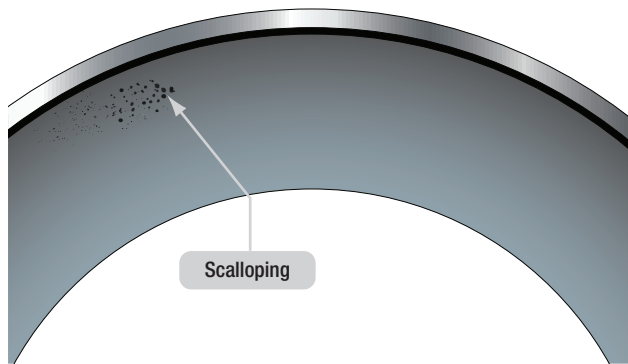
Improper loose torque on the axle nut can cause excessive end play leading to bearing race damage known as scalloping.
